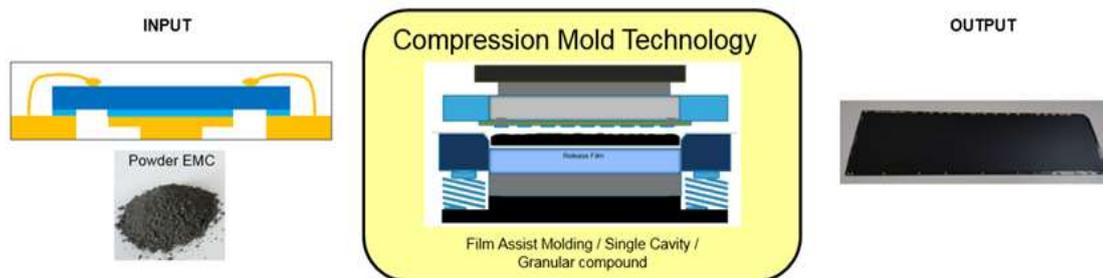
Compression molding process using granular molding compound on a single cavity with film assist molding.
